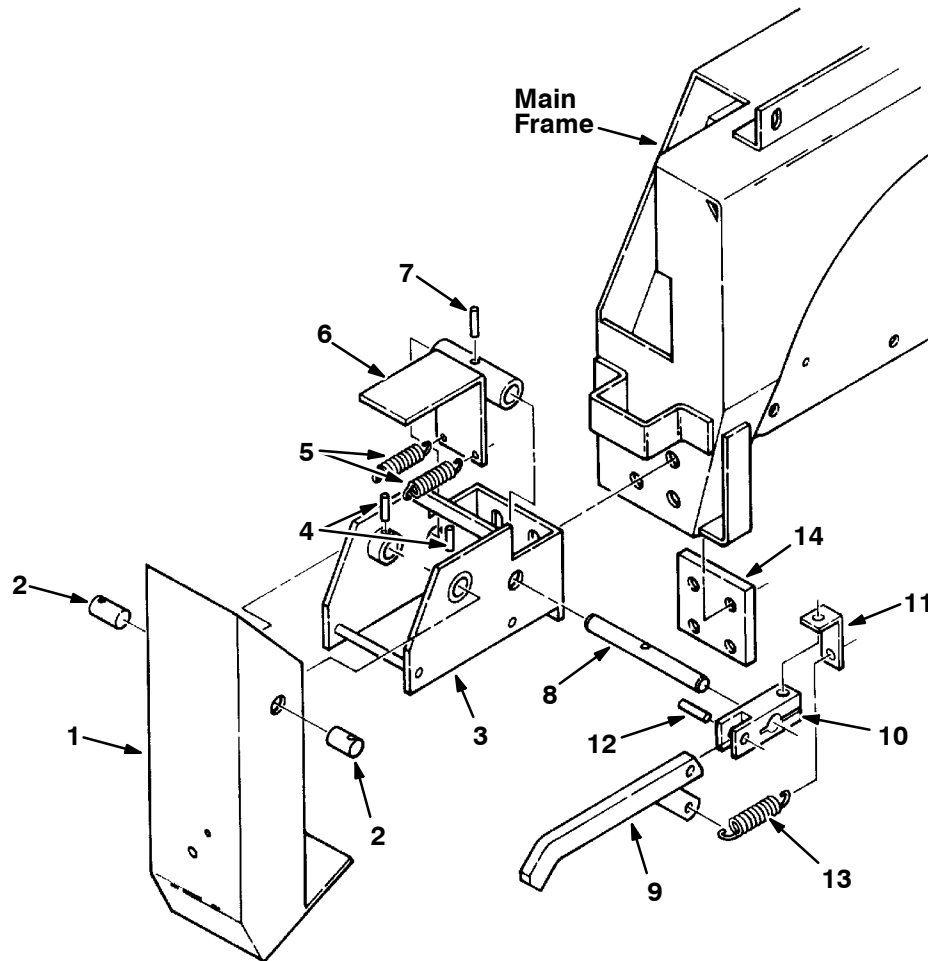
Stabilizer Leg Assembly, Multi-Level Dump
